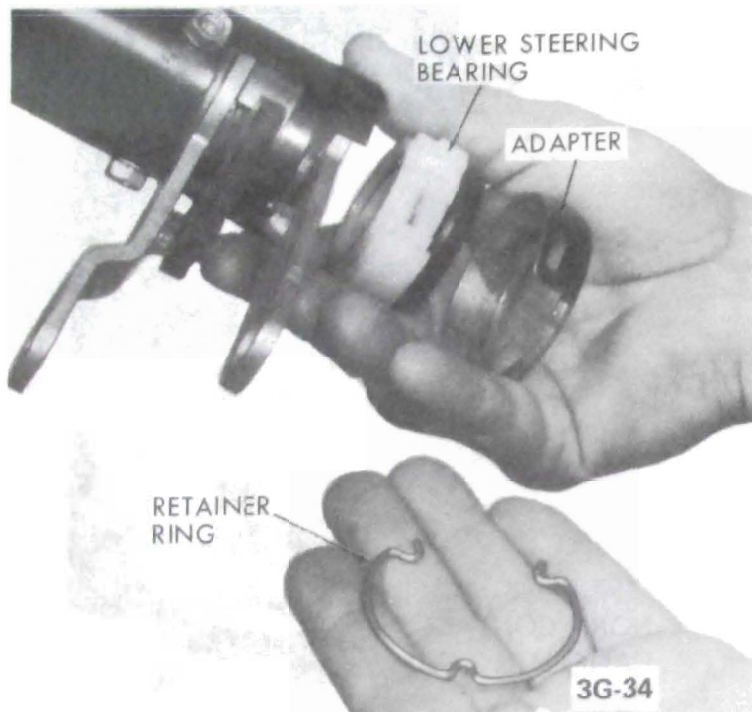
G-34 - Installing Lower Steering Column Bearing - Manual Transmission
